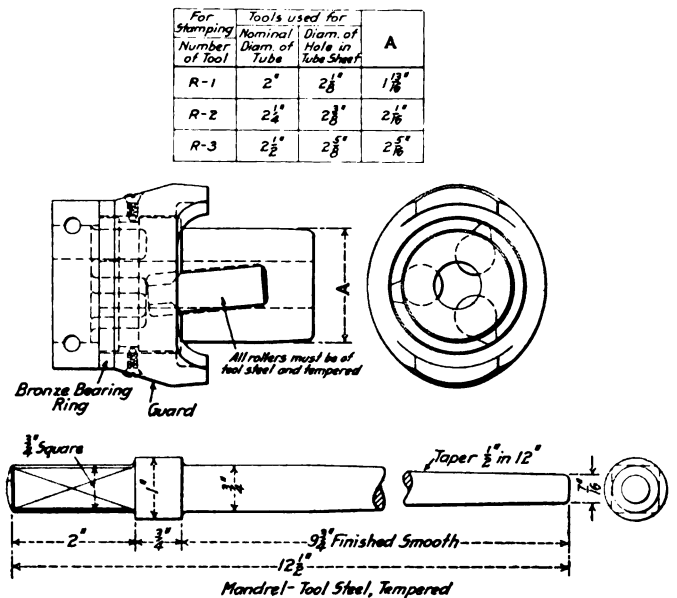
Self-Feed Roller Expander for Tubes 2, 2¼ and 2½ In. in Diameter.
